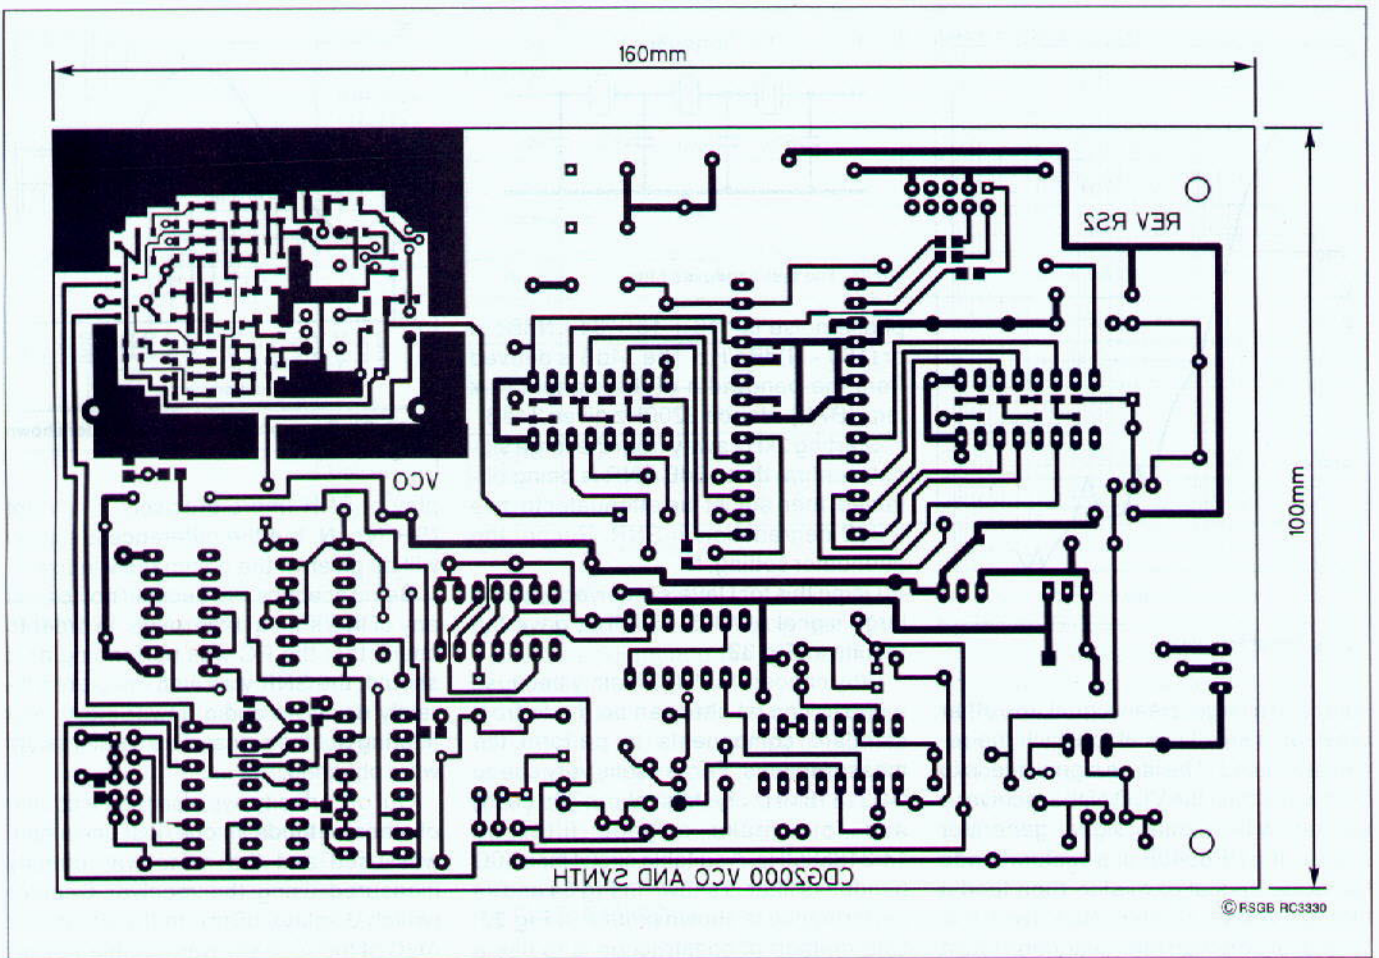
PCB tracking for the synthesiser board, viewed from the component side. Actual size.
